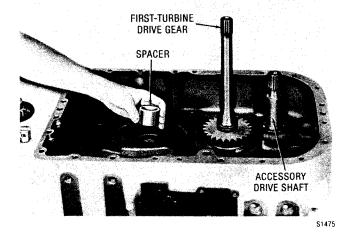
Installing forward-and-reverse sun gear spacer (-1 models)
